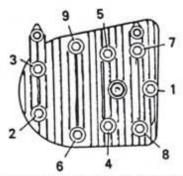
Tighten cylinder head cap screws on Models HM80, VM80, HM100 and VM100 in sequence shown to a torque of 180 in.-lbs. (20 N·m).
